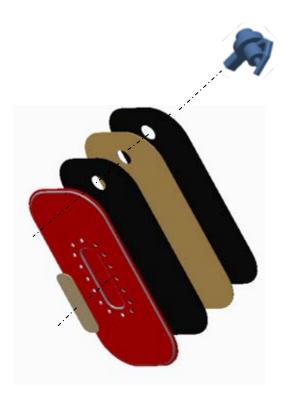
Exploded View of Consumer Grade Levitating Hoverboard
